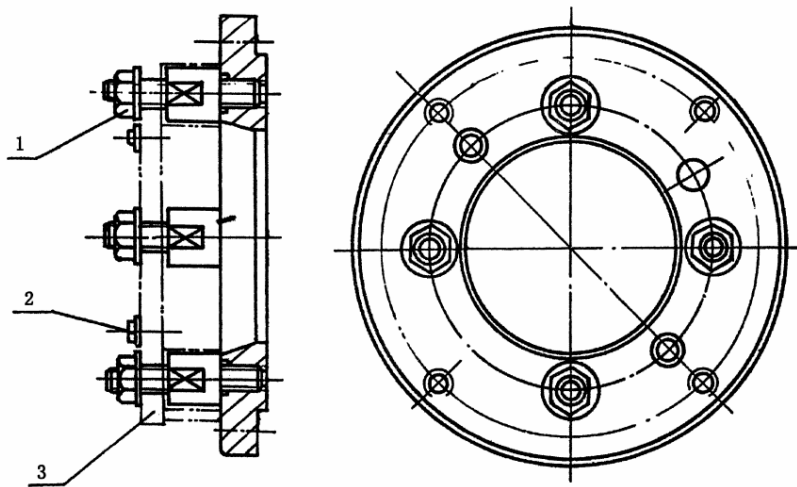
Mounting of chuck or driving plate onto spindle ISO702/ No.6
